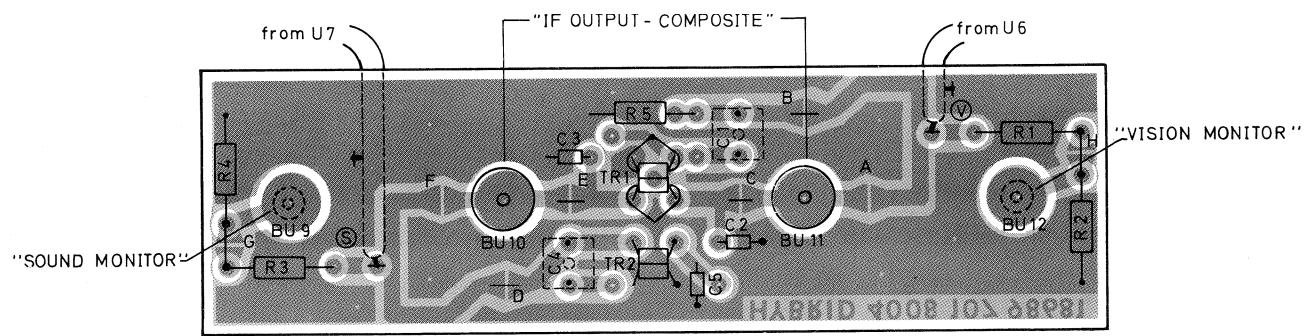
Printed wiring board, hybrid coupler, unit 9
